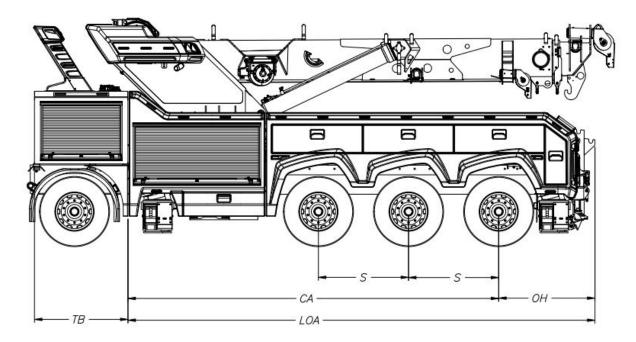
CHASSIS DIMENSIONS - SIDE VIEW (CSR85 SHOWN)
